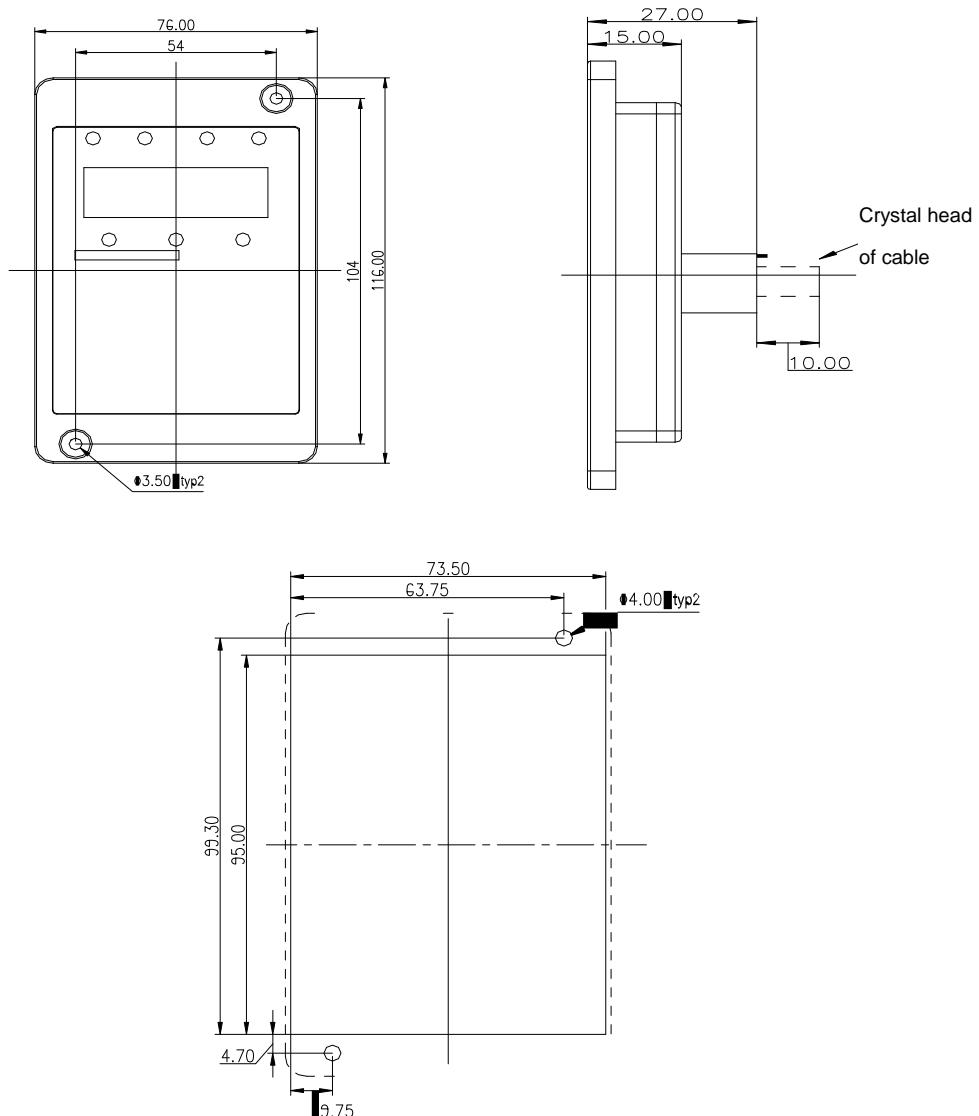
Appearance and installation dimension of external keypad (keypad tray)
